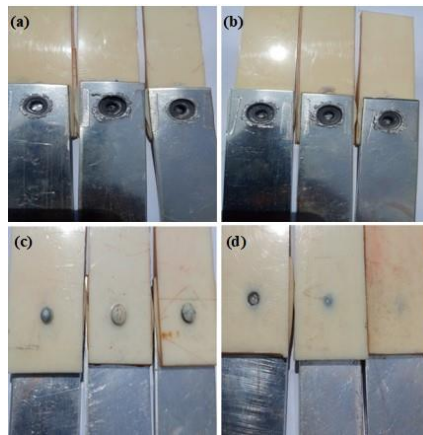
Surface Appearances of Hybrid Al/ABS Joints, (a) Front Views of FSSW Joint, (b) Front Views of FSC Joint, (c) Back Views of FSC Joint, (d) Back Views of FSSW Joint
